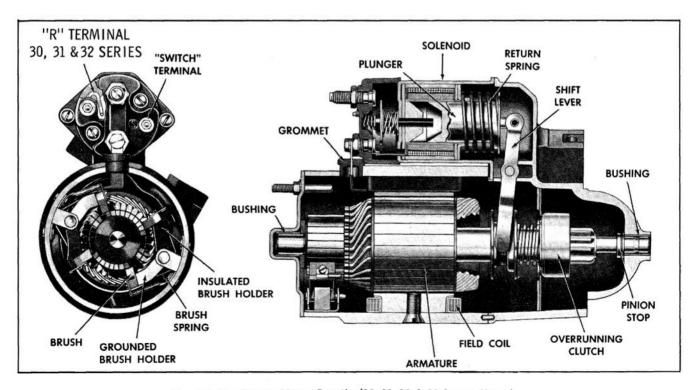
Starter Motor Details (30-31-32 & 33 Series Shown)
